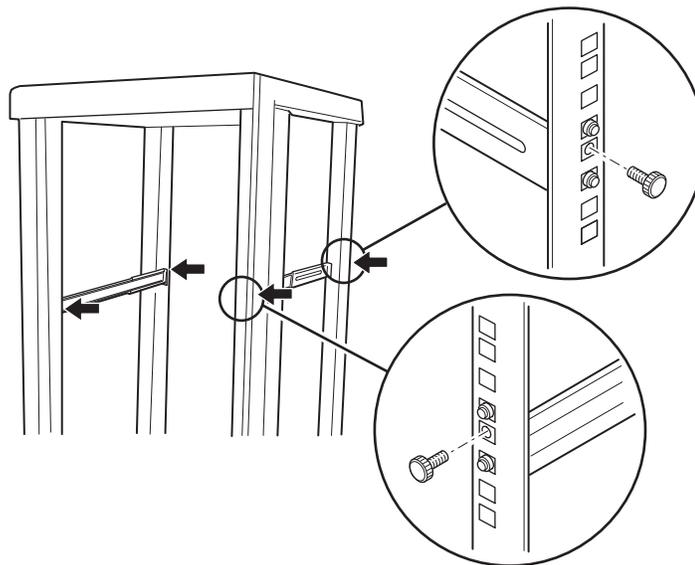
Marking the Mounting Holes for the SPSH4 on the Front of the Rack
